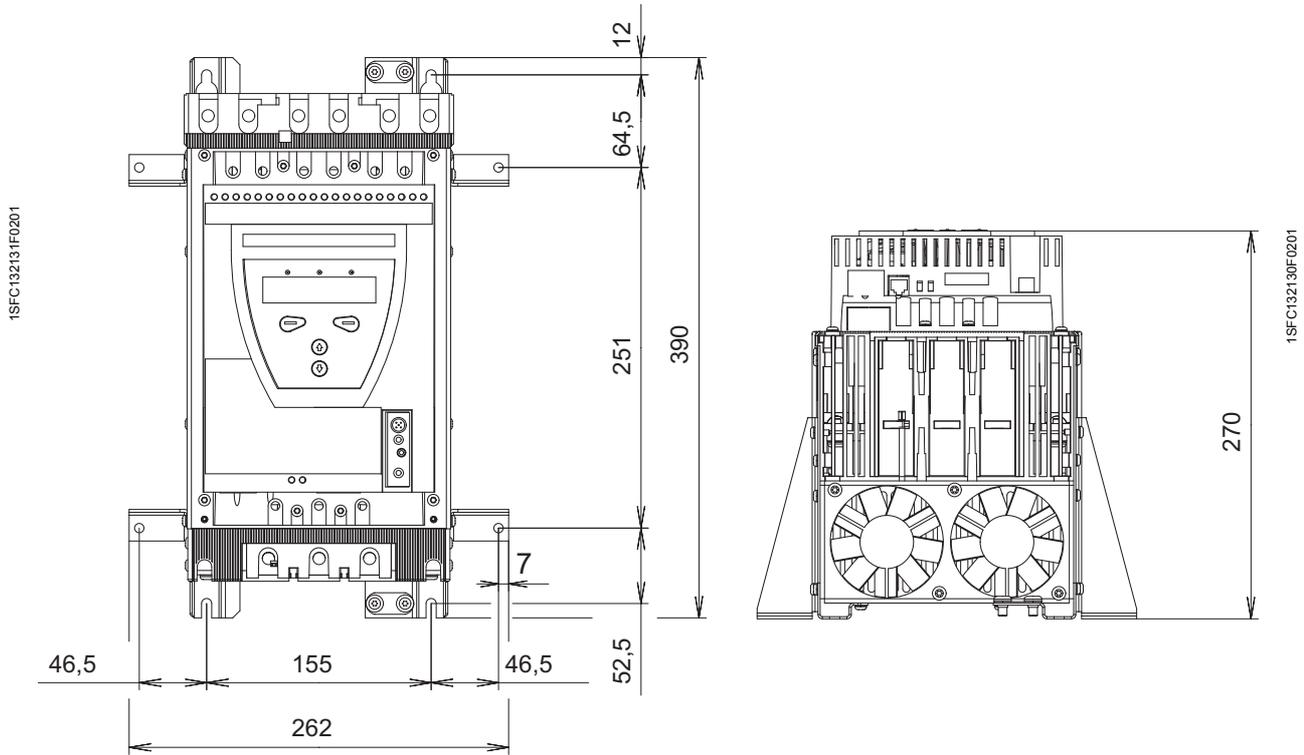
Dimensions PST85..142 with marine kit (mm) (1 mm = 0.0394 in)
